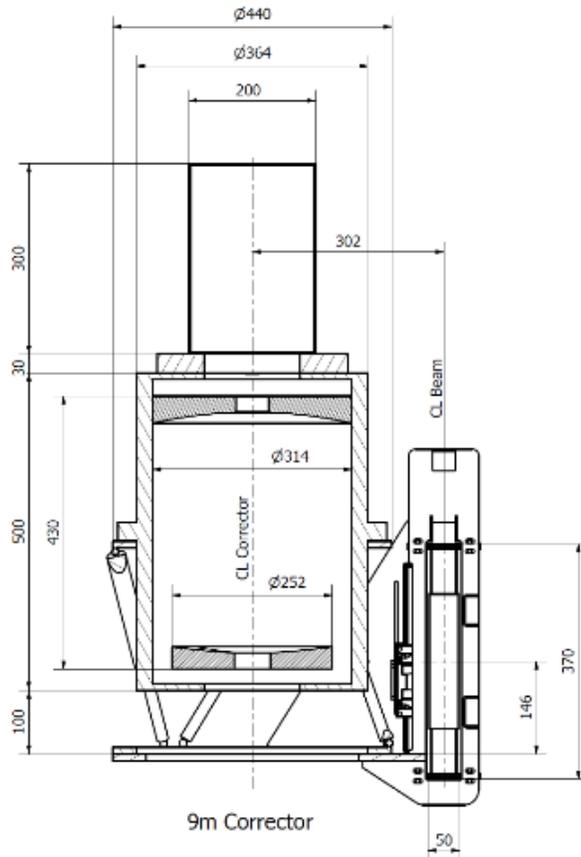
Sectional view of the MSAC, swing arm, and trolley.
